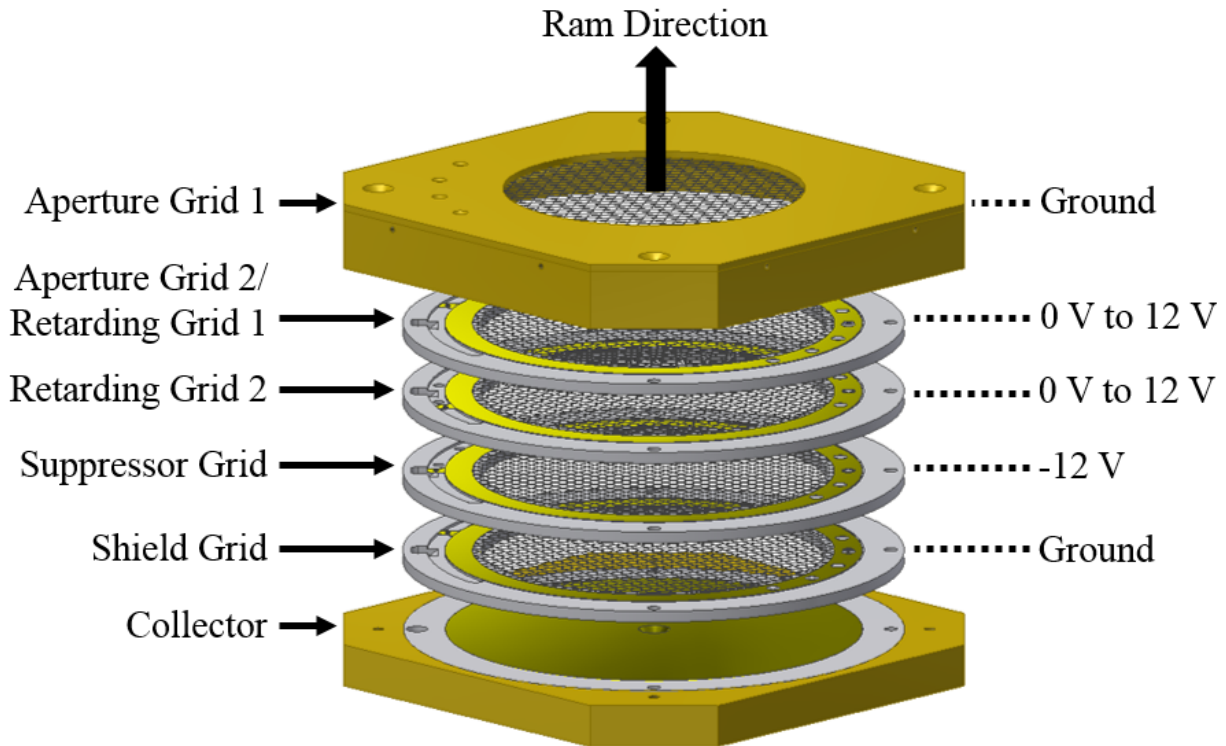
Mechanical assembly of the CuRPA sensor surface. The printed circuit boards housing the control and measurement electronics are located beneath the collector.
